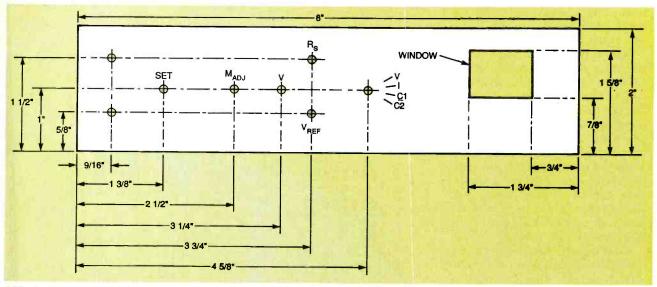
HOLE DRILLING TEMPLATE for front panel. Hole diameters will depend on components selected.
